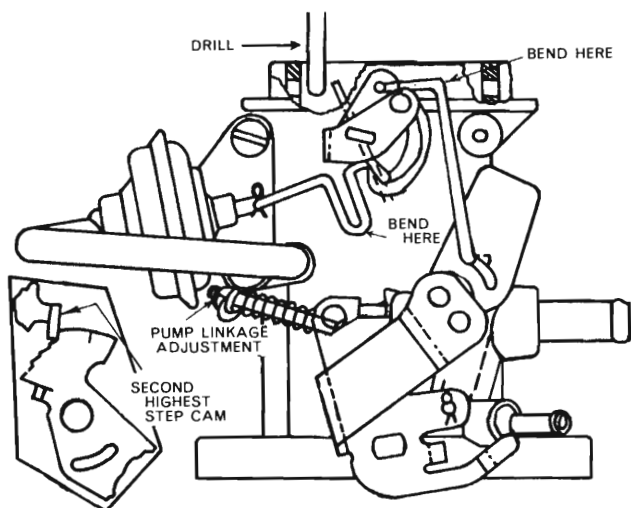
Fast idle cam position for choke setting pump adjustments
